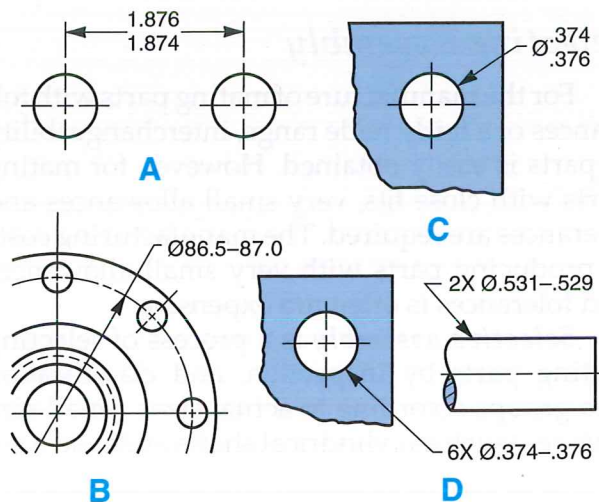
Only the maximum and minimum dimensions are given when using limit dimensioning. A—When the limit dimensions are given directly, the maximum dimension always appears above the minimum dimension. B—When the limit dimensions are given as a note, the minimum dimension always comes before the maximum dimension. C—When a size dimension is given directly, the dimension representing MMC is given above the dimension representing LMC. D—For size dimensions given in note form, the dimension representing MMC precedes the dimension representing LMC.
